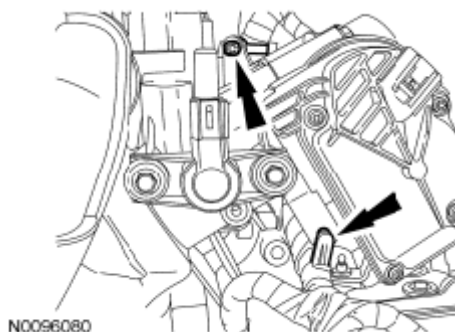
Locating Intake Manifold Wiring Harness Retainers
